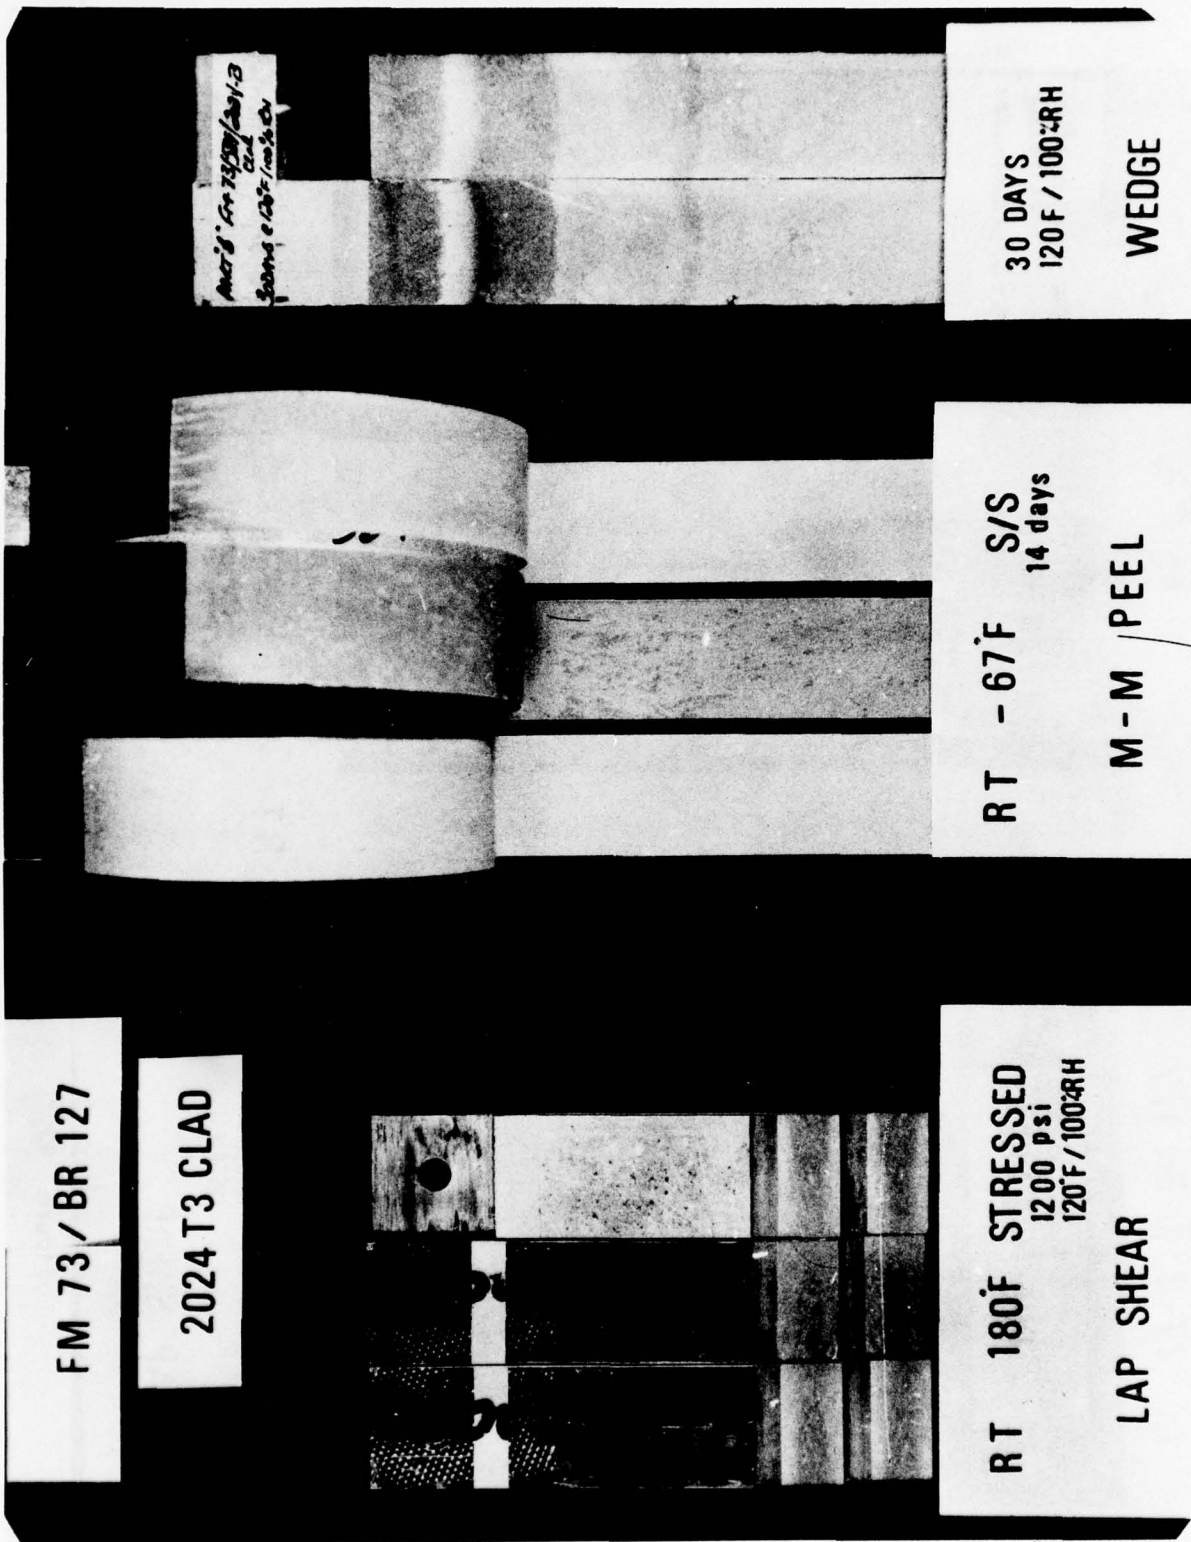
Specimen Bond Surfaces -- FM 73, 2024-T3 Clad
